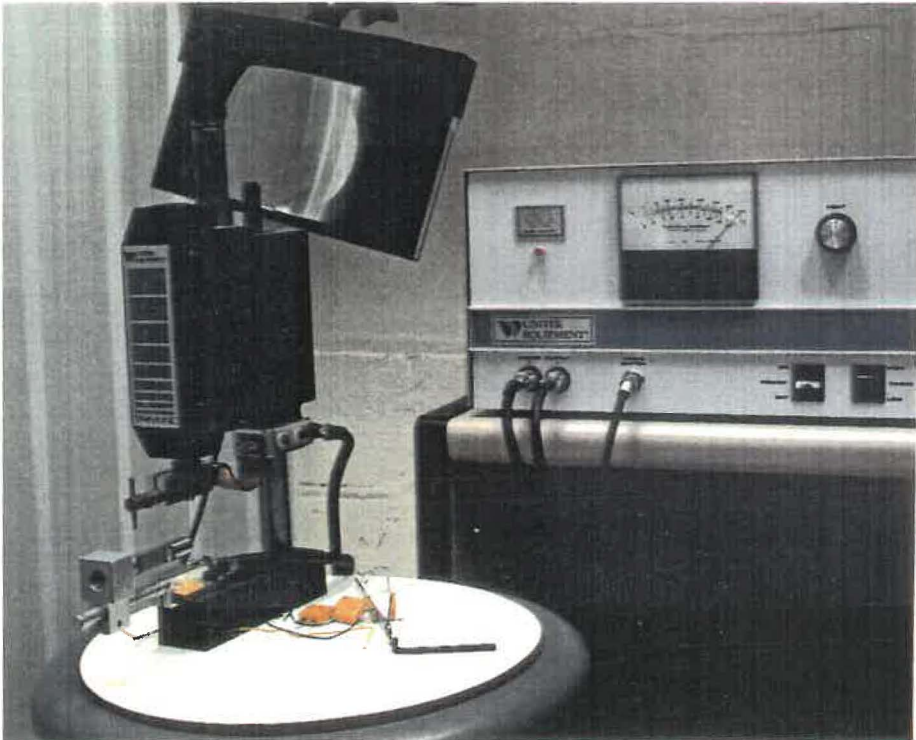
An overview of ACPD probe spot weld instruments.
